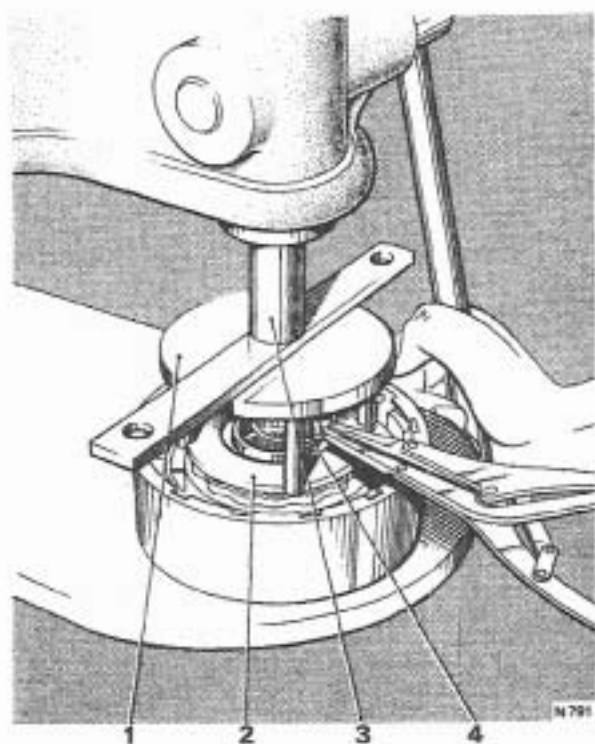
REMOVING AND FITTING THE FORWARD CLUTCH HOUSING SNAP RING
